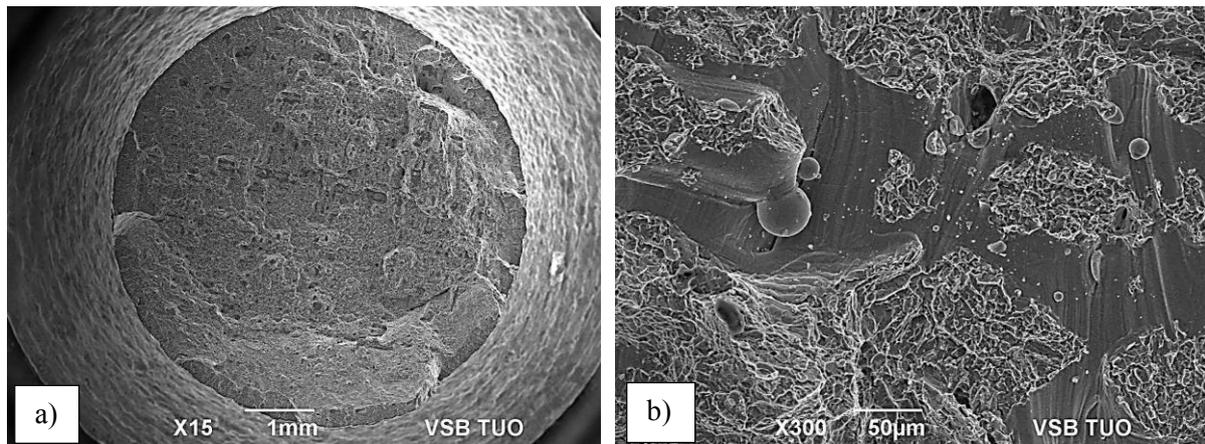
Tensile fracture of Ti6Al4V specimen tested in heat treated condition: a) view of rugged failure surface, b) detail of mixed fracture feature with shear areas, transgranular quasi-cleavage surfaces, voids and unmelted powder particles.
